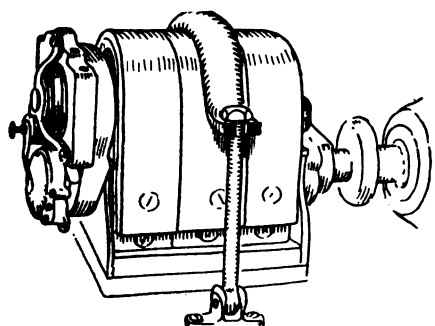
Method of fastening and drive of the Bosch high-tension magneto on the Lozier.
